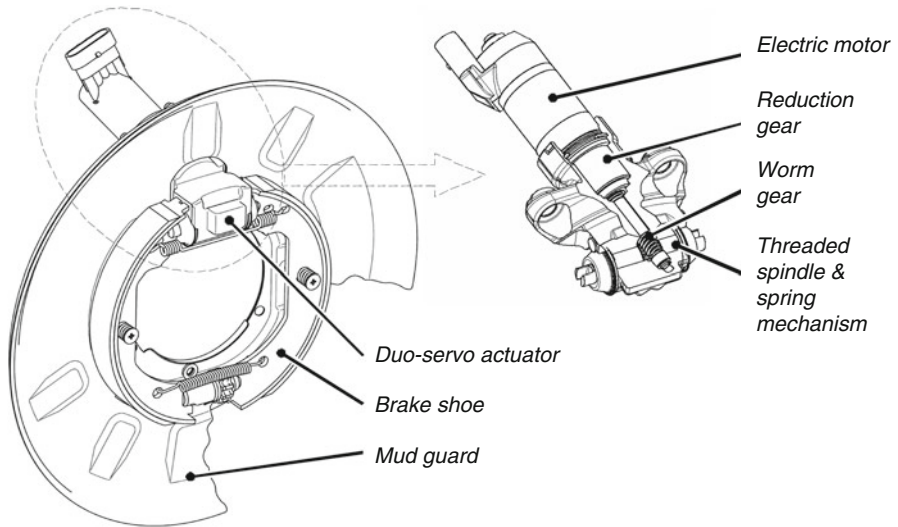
Actuator for duo-servo drum-in-hat parking brake
